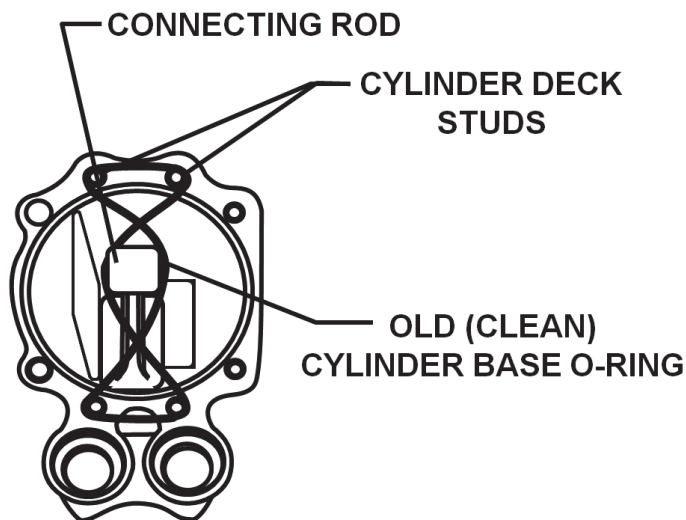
Cylinder Base O-Ring supporting Connecting Rods
